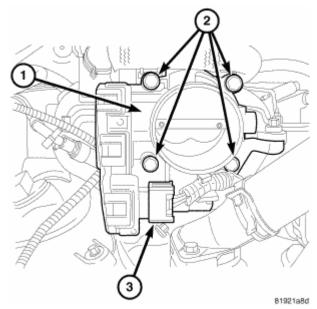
Throttle Body 3.8L Courtesy of CHRYSLER LLC
